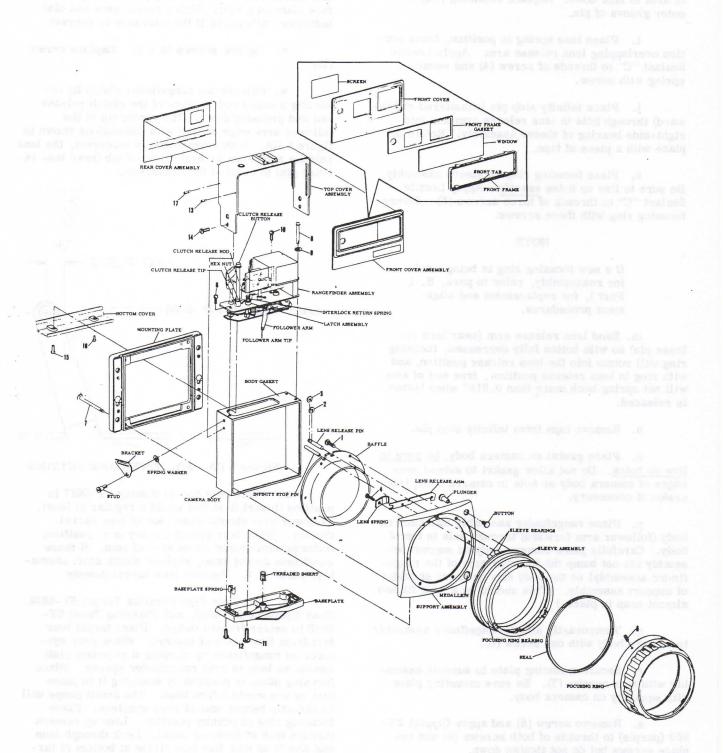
RANGEFINDER CAMERA BODY COMPLETE
